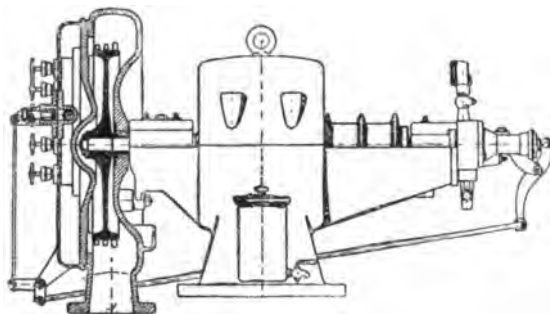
A.E.G. Single-stage Steam Turbine coupled to Electric Generator.
